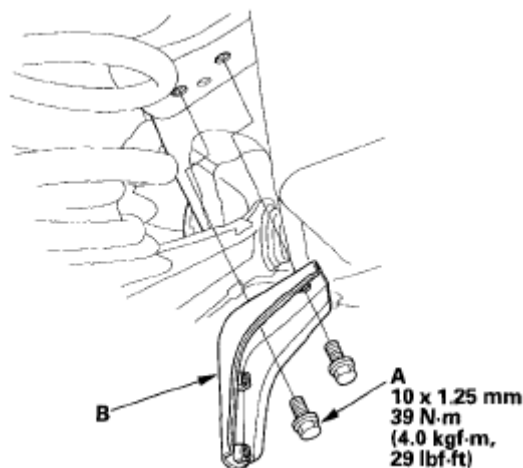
Identifying Flange Bolts And Stabilizer Bar Bracket (With Torque Specifications)
